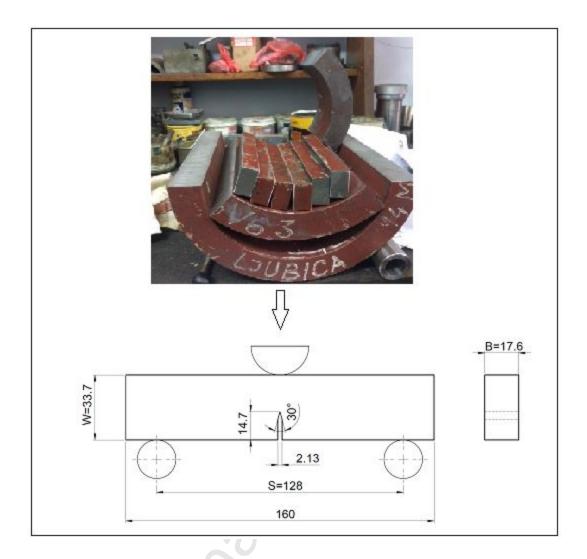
Test specimen from the pipe shown in the photograph (all dimensions in millimetres)
